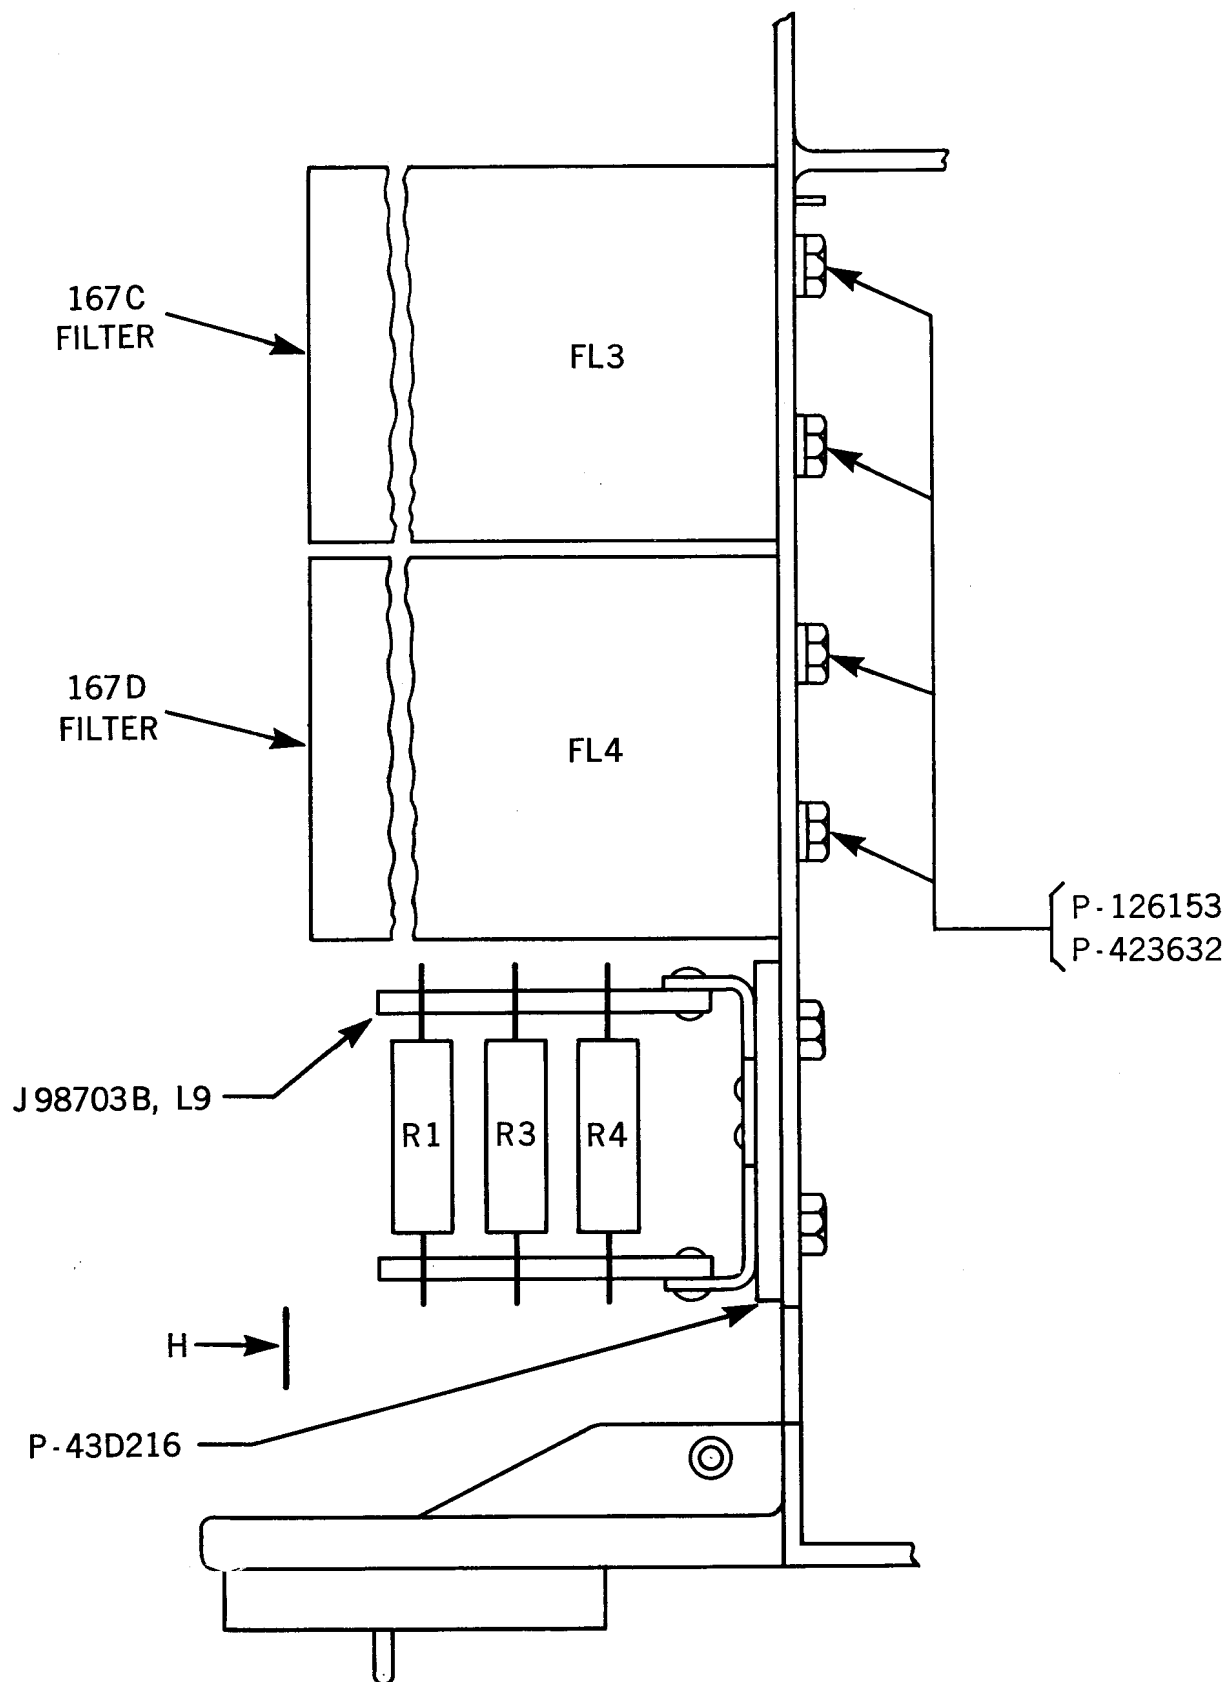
Part of L-L Subassembly per ED-92764-30 or ED-92846-30
